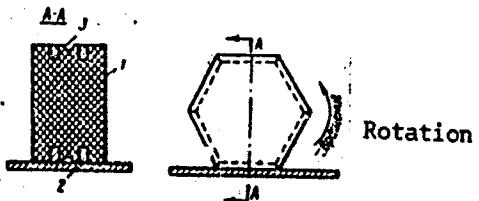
1--casing; 2--metal electrodes; 3--recess
